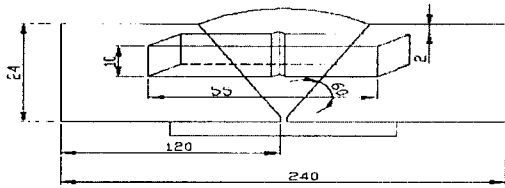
Schematic diagram of Charpy V notch impact test specimen in the weld joint geometry(unit:mm)
